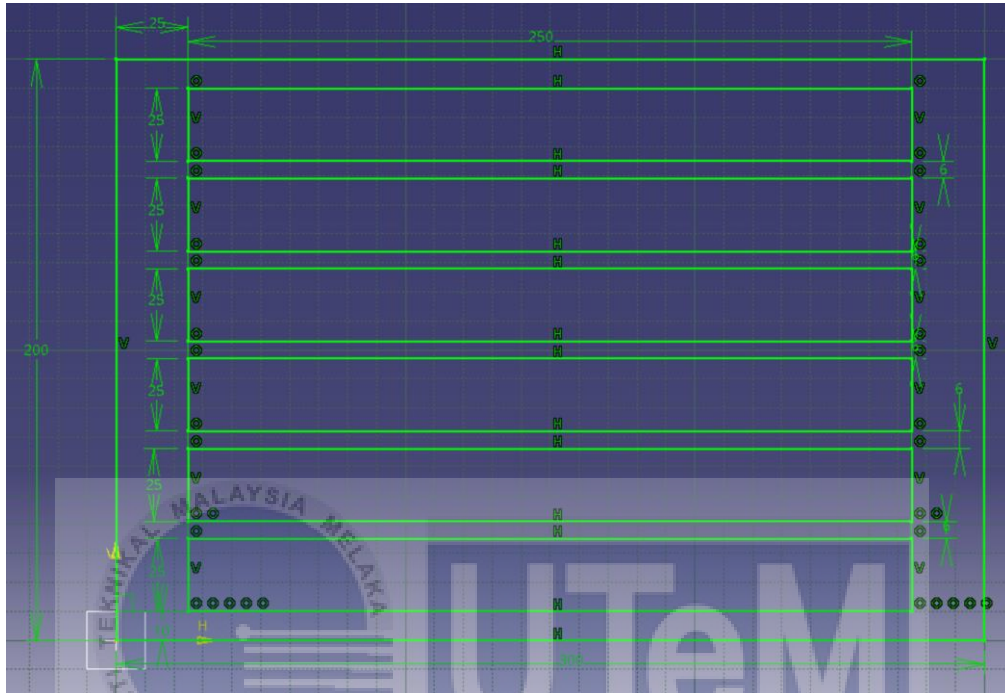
The dimensional design of specimens for tensile and flexural testing
